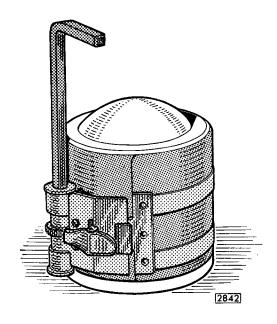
Using a piston ring clamp for refitting a piston. (Churchill Tool No. 38U3).
